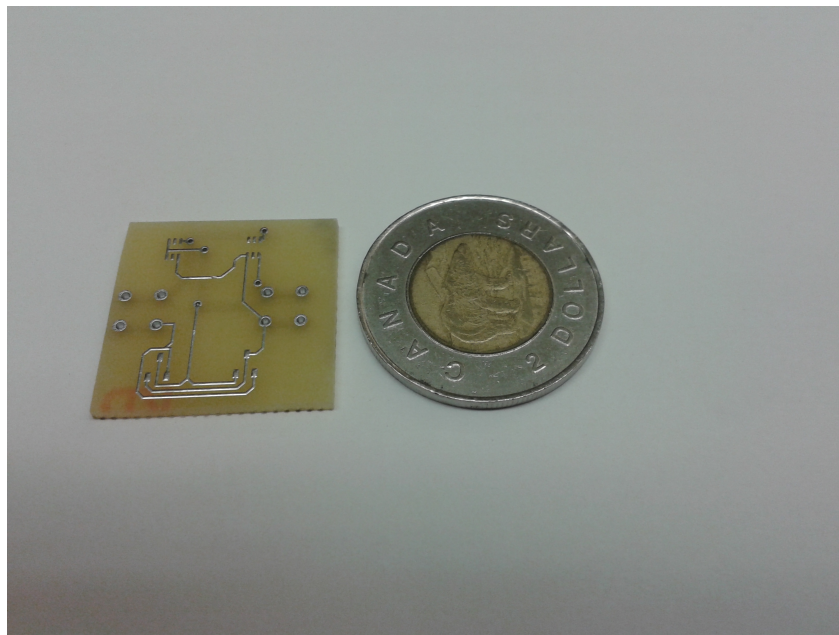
Fabricated PCB of passive MOSFET rectifier and toonie
